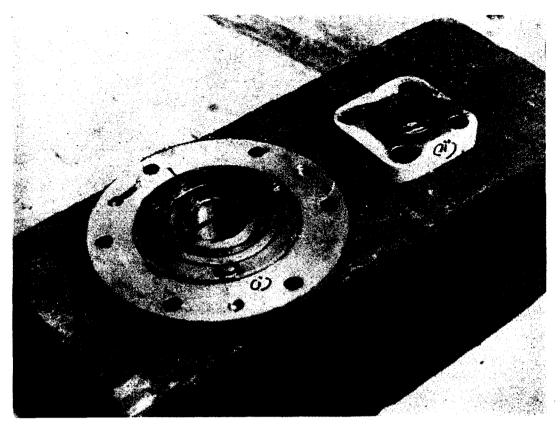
END BEARING CAP AND BLANK FLANGE FROM PRESSURE PIPE SYSTEM. UPPER PORTION IN PHOTOGRAPH OF THE BLANK FLANGE HAS BEEN CLEANED, THE REMAINDER IS STILL HEAVILY COATED
